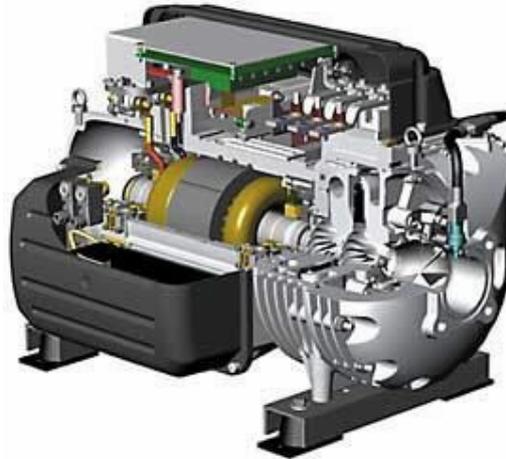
Turbocor Compressor Cutaway showing control unit, impellers, motor, etc
